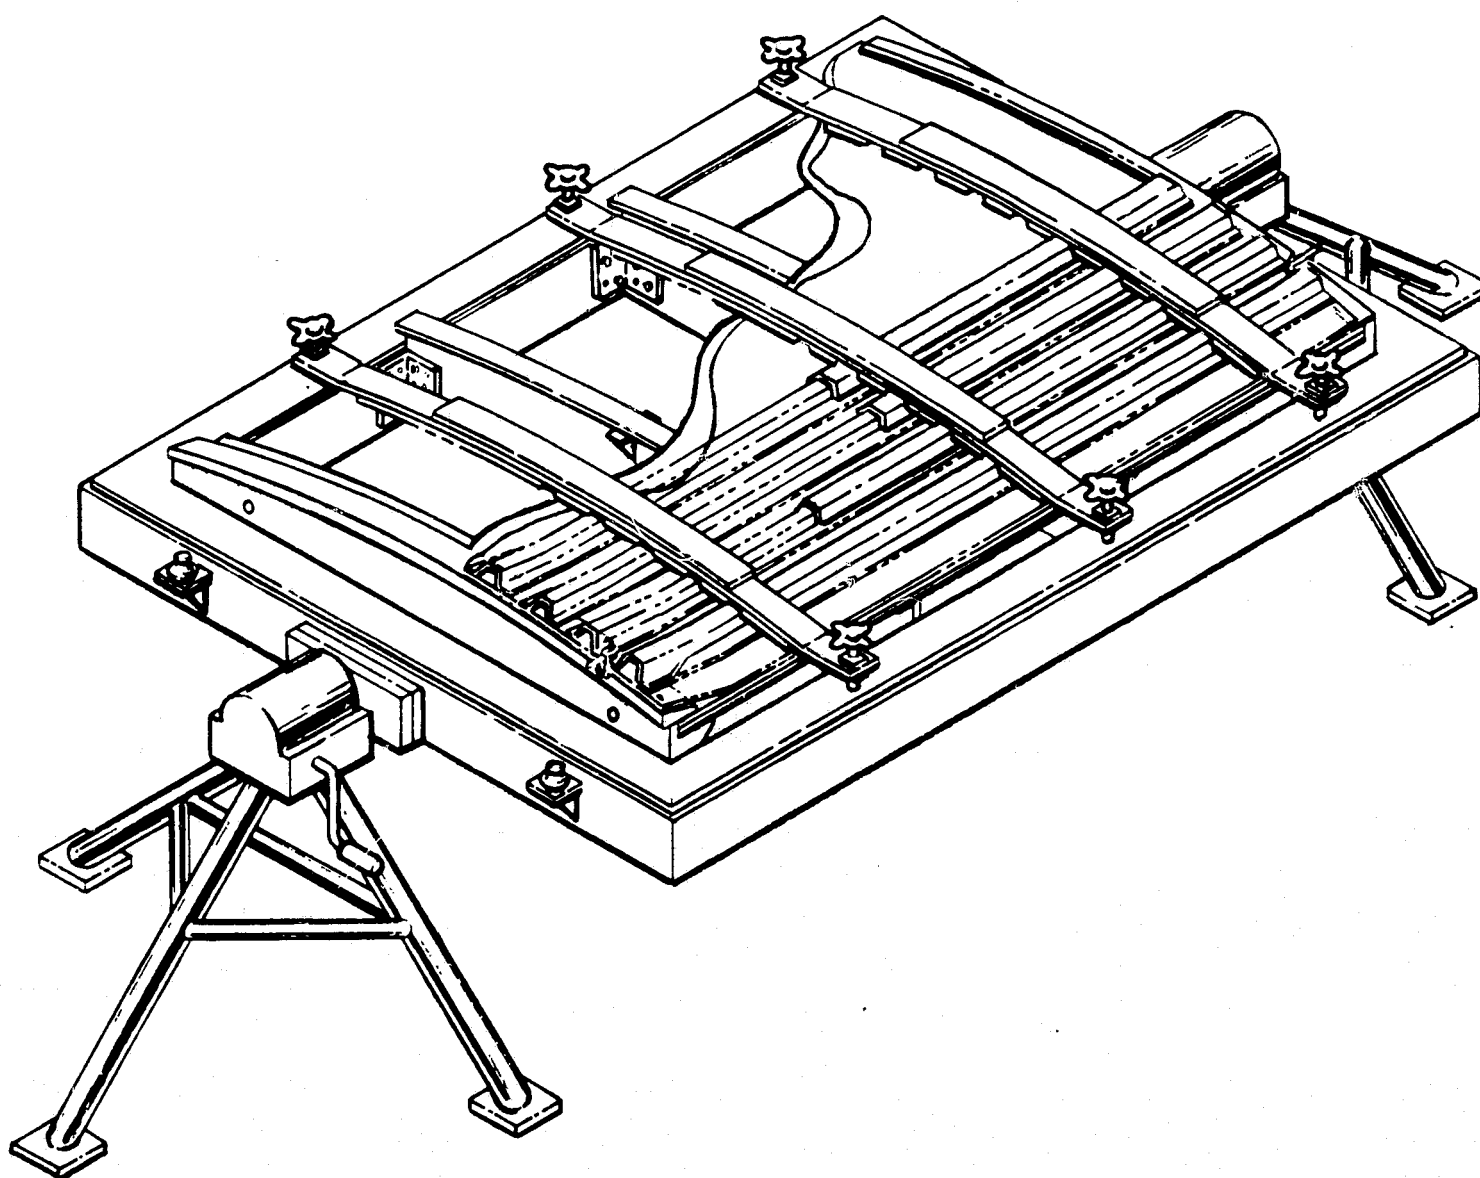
AFT SKIRT SKIN SEGMENT ASSEMBLY FIXTURE
